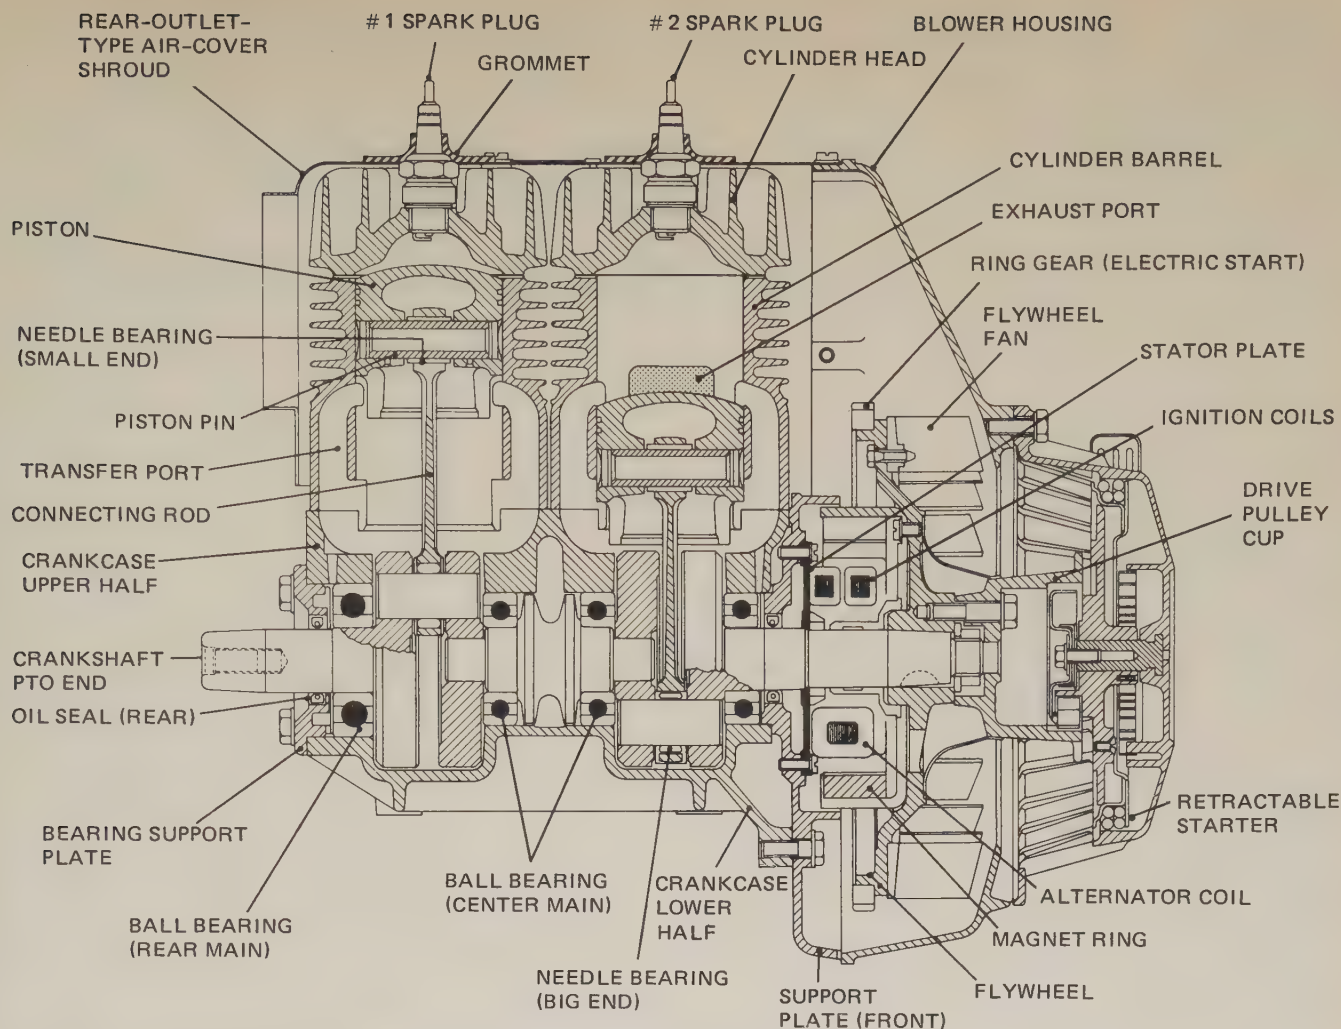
In a two-cycle engine with more than one cylinder, such as this two-cycle two-cylinder engine, each of the cylinders must have its own sealed crankcase. The sealed ball bearings placed between the cranks of the crankshaft, as shown, provide this seal. (Kohler Company)
